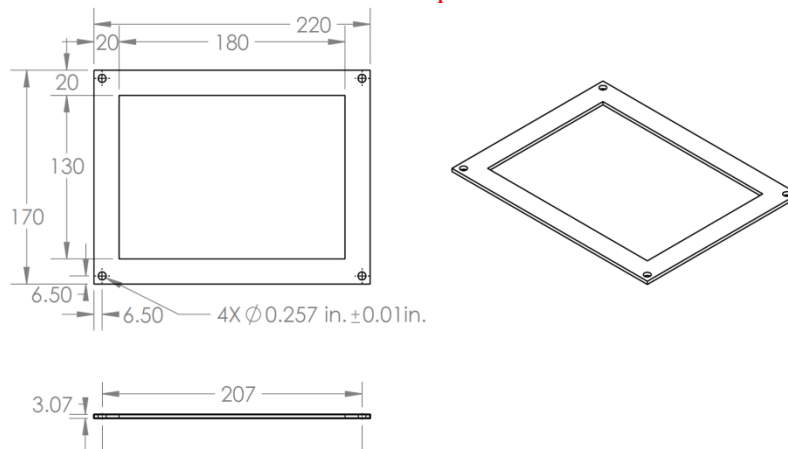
The cutting plate for our final design. All dimensions are in mm with a tolerance of 0.1 mm unless other specified.
